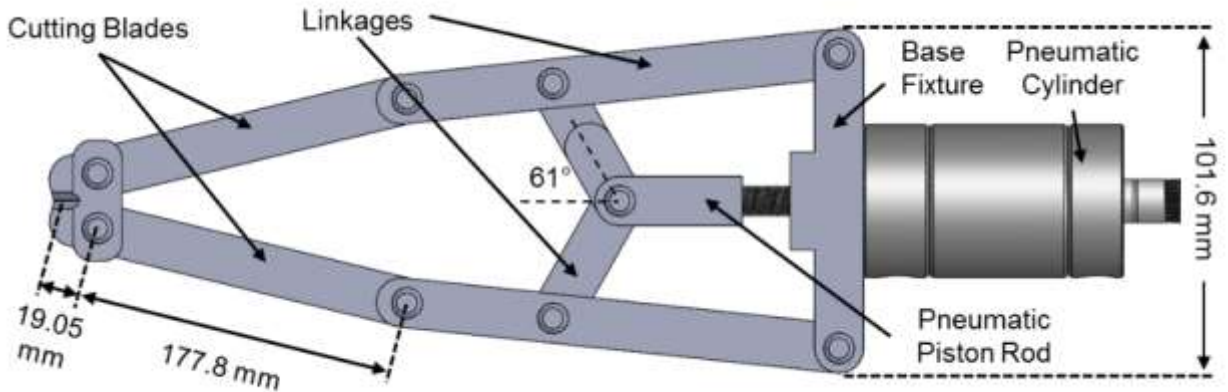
Bolt cutting design shown in its *closed* state, top view
